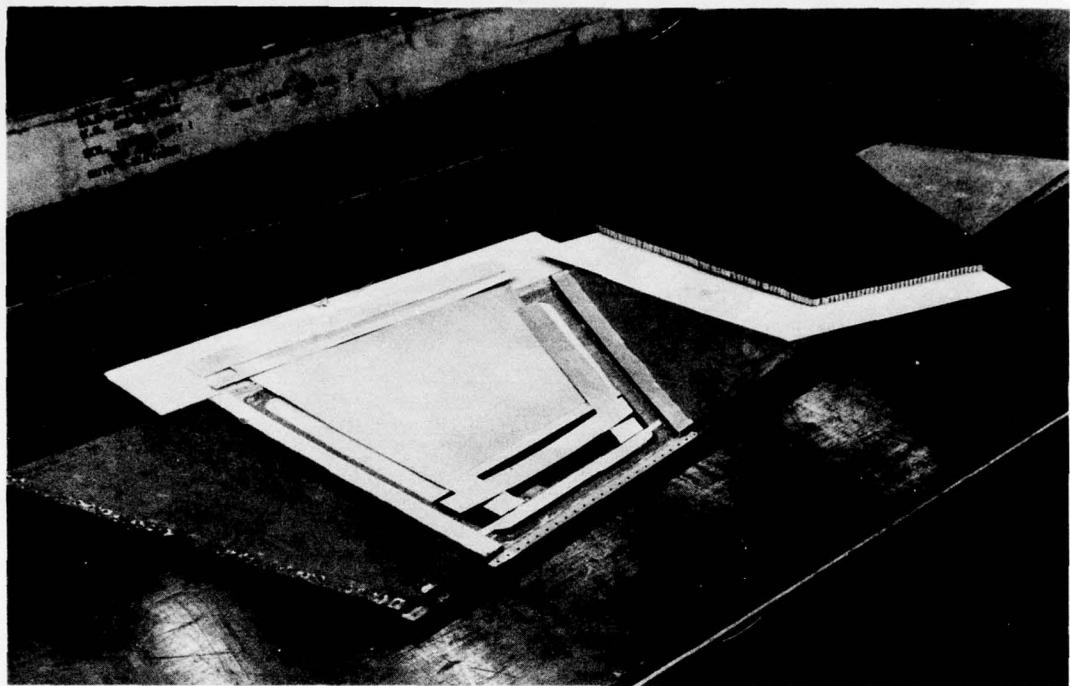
A-6 Fin Repair Details Ready for Assembly
